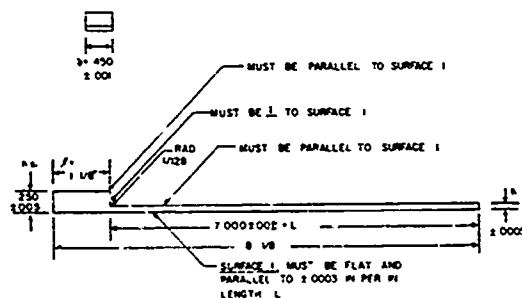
Sandwich beam specimen Recommended specimen dimensions for sandwich beams (figure 4) are:
